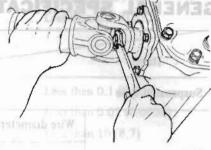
Tightening Side Yoke Fitting Bolt
